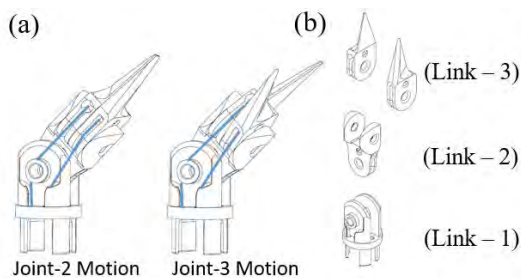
(a) CAD of new wrist with centre pivot (joint-1 motion is the rolling of the shaft), (b) exploded view of links.
